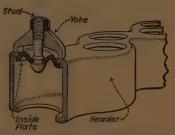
Fittings for elliptical handhole in wrought steel header.
